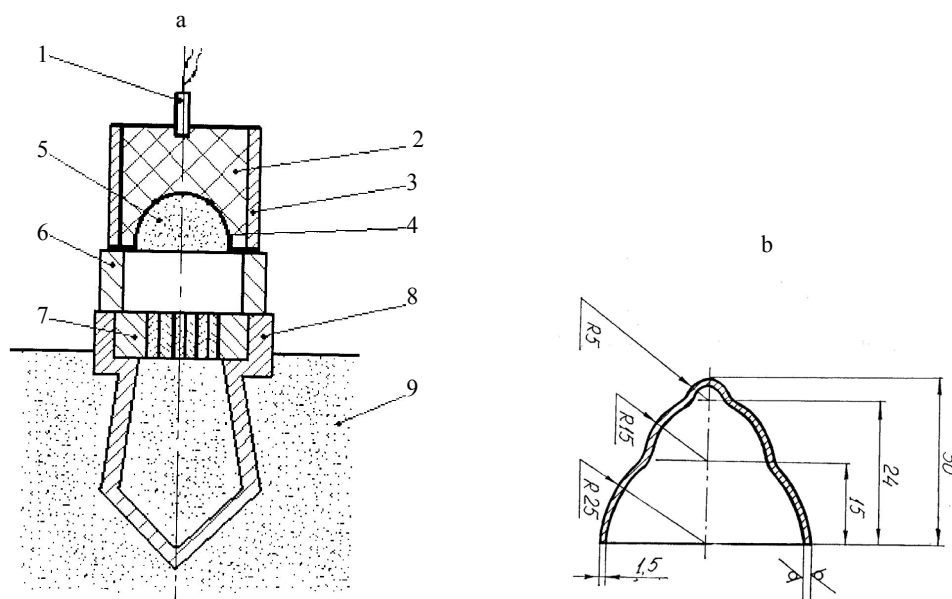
Scheme of steel R6M5 specimen's treatment: 1 – electric detonator; 2 – explosive charge; 3 – casing of the explosive charge; 4 – lens; 5 – powder; 6 – adjusting support; 7 – set with specimens; 8 – container; 9 – sand
